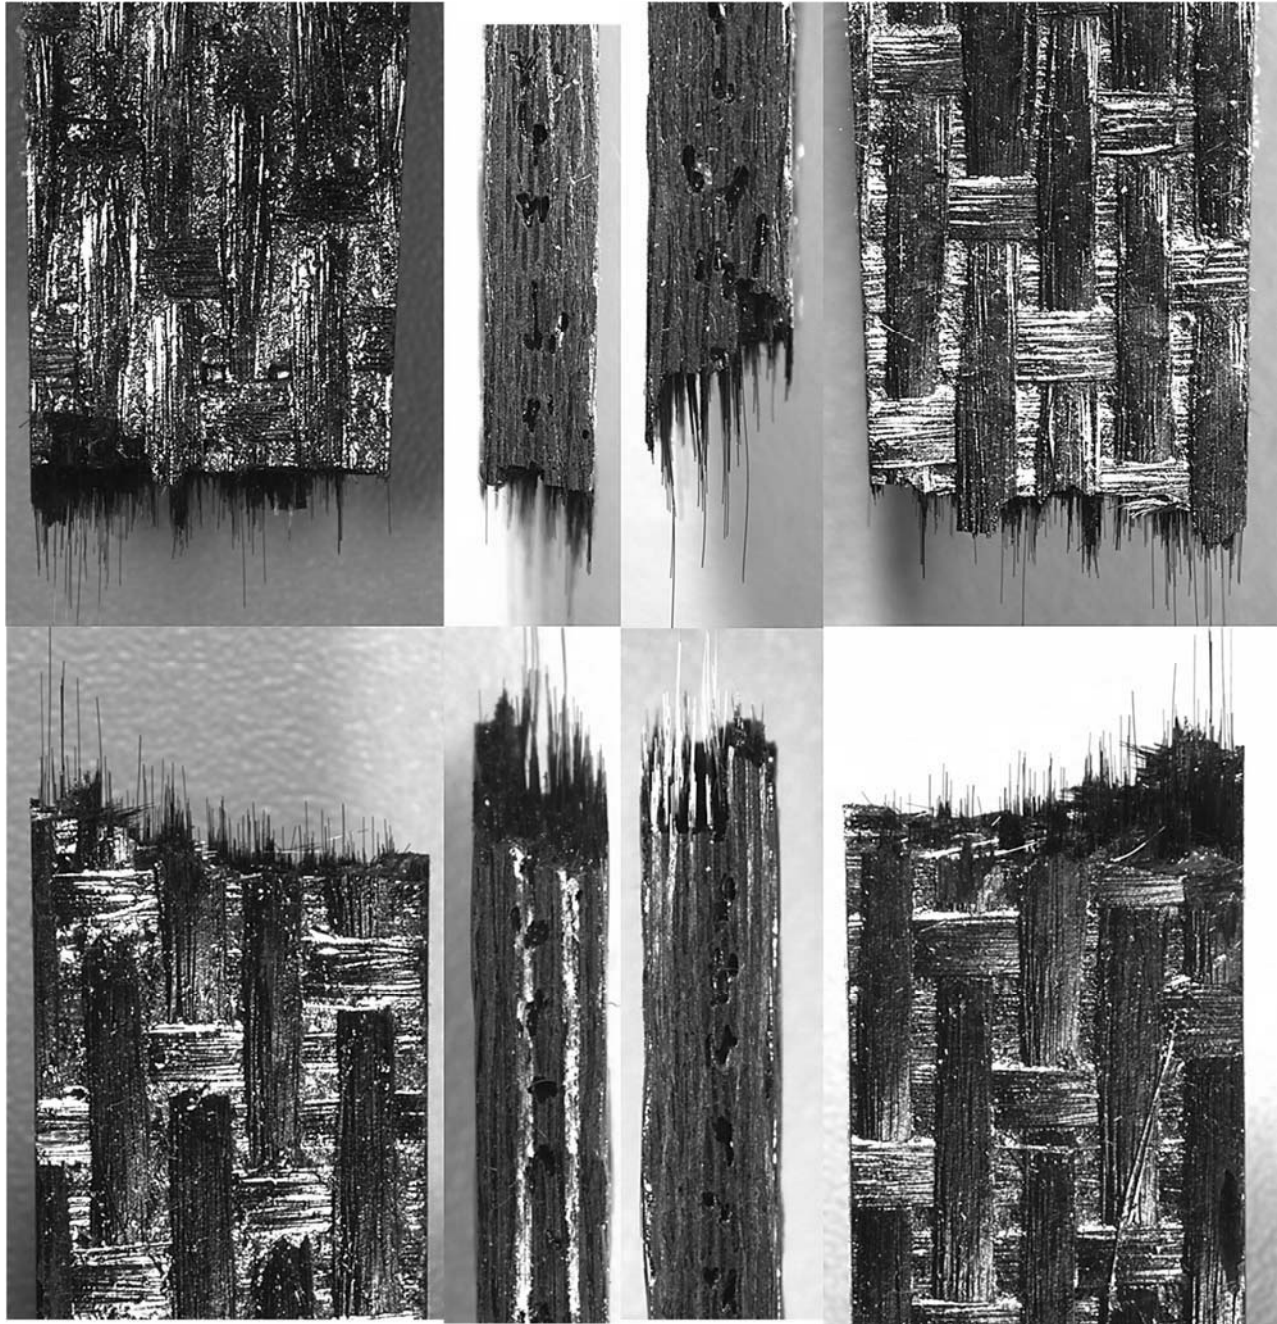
Top and bottom fracture surfaces of specimen 16-045, tested in fatigue to failure at 1200°C in air. $\sigma_{\max} = 140$ MPa, $N_f=2,200$
